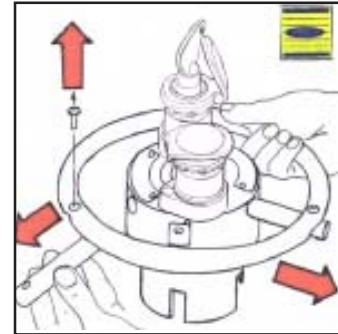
If lock needs adjustment in the open position, remove handwheel spokes. Only required if open position is not adjusted per instruction Fig.1
